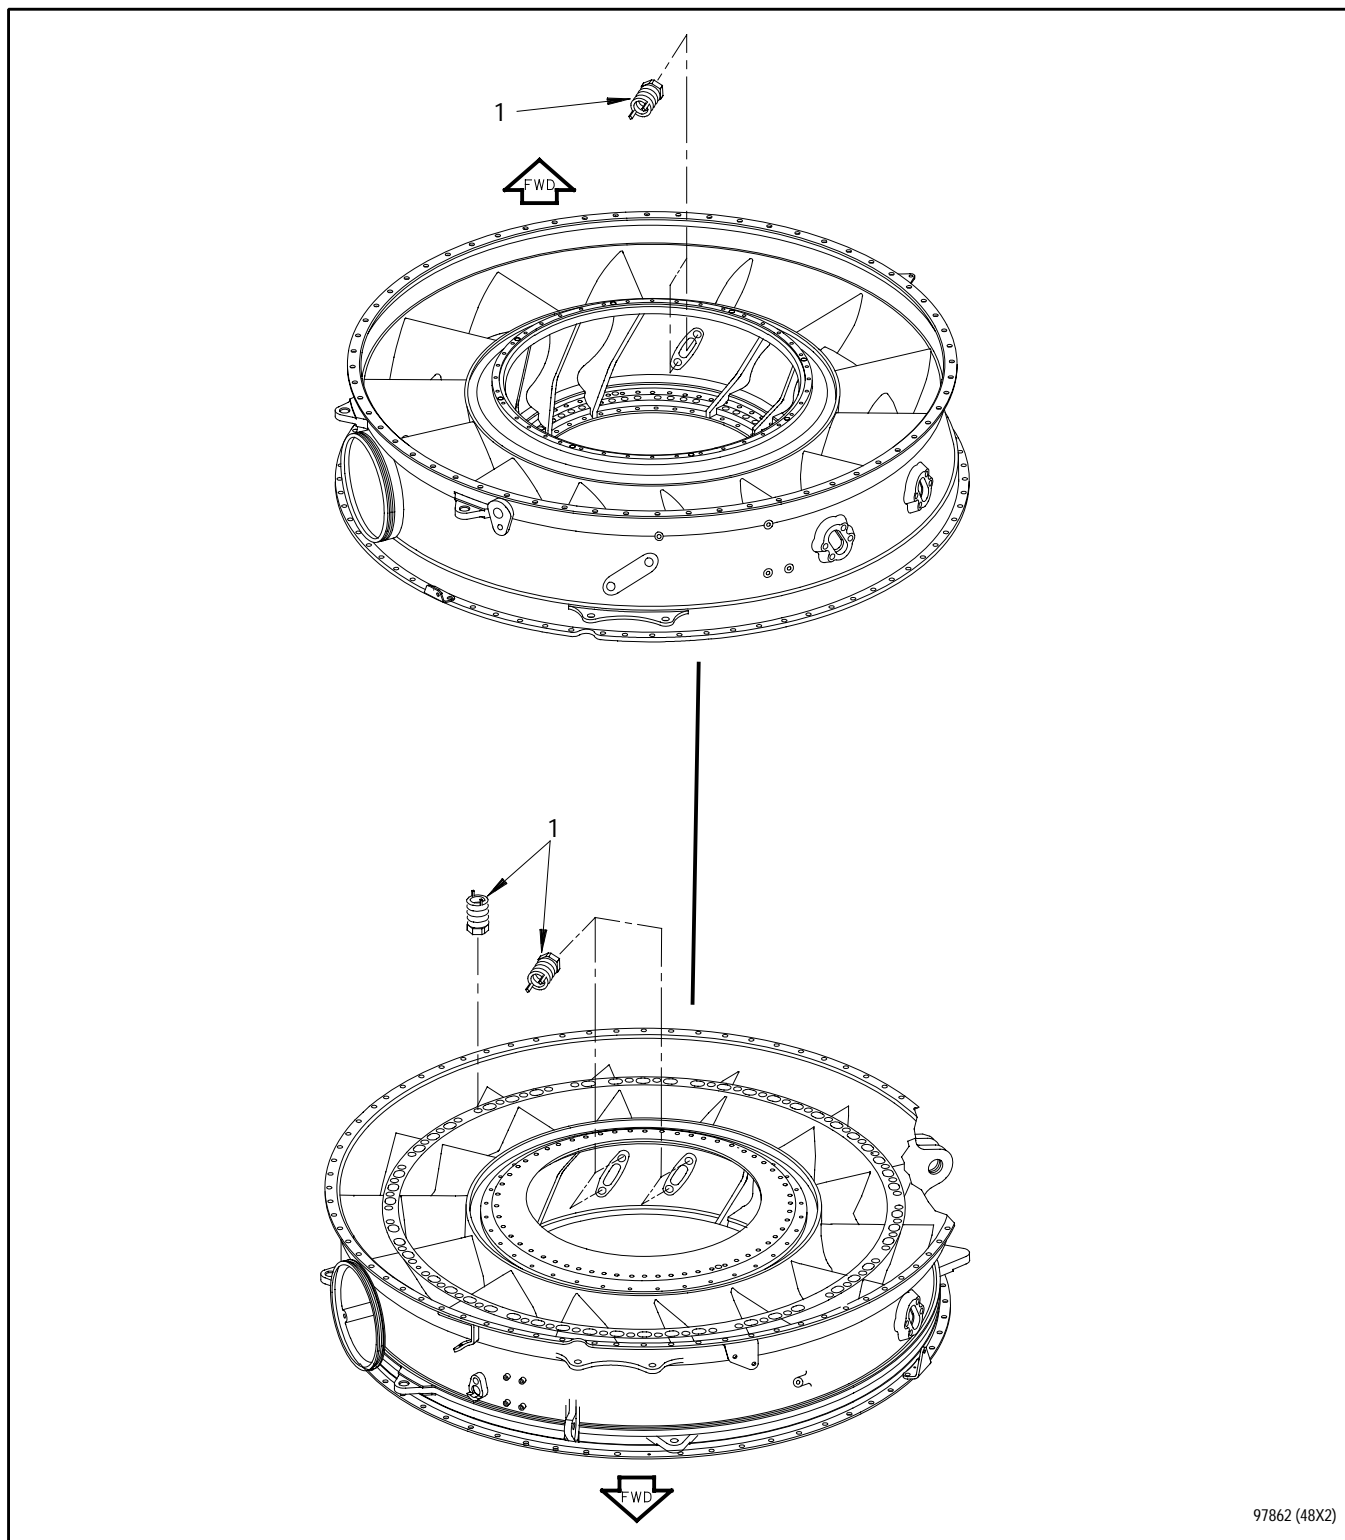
Compressor Intermediate Case - Self-Locking Screw Thread Insert Replacement (Sheet 1 of 2)
